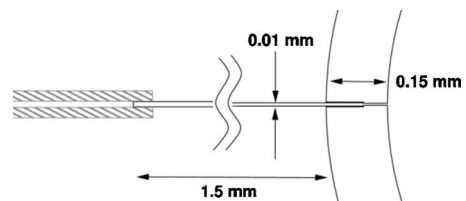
Detail of the shell and fill-tube assembly showing the section of the spherical ablator shell $0.15\ \text{mm}$ thick with the fill-tube. The borosilicate fill-tube is $0.010\ \text{mm}$ in diameter where it enters the shell, tapering up to $0.020\ \text{mm}$ where it is inserted into the larger diameter polyimide-coated silica-glass tube.
